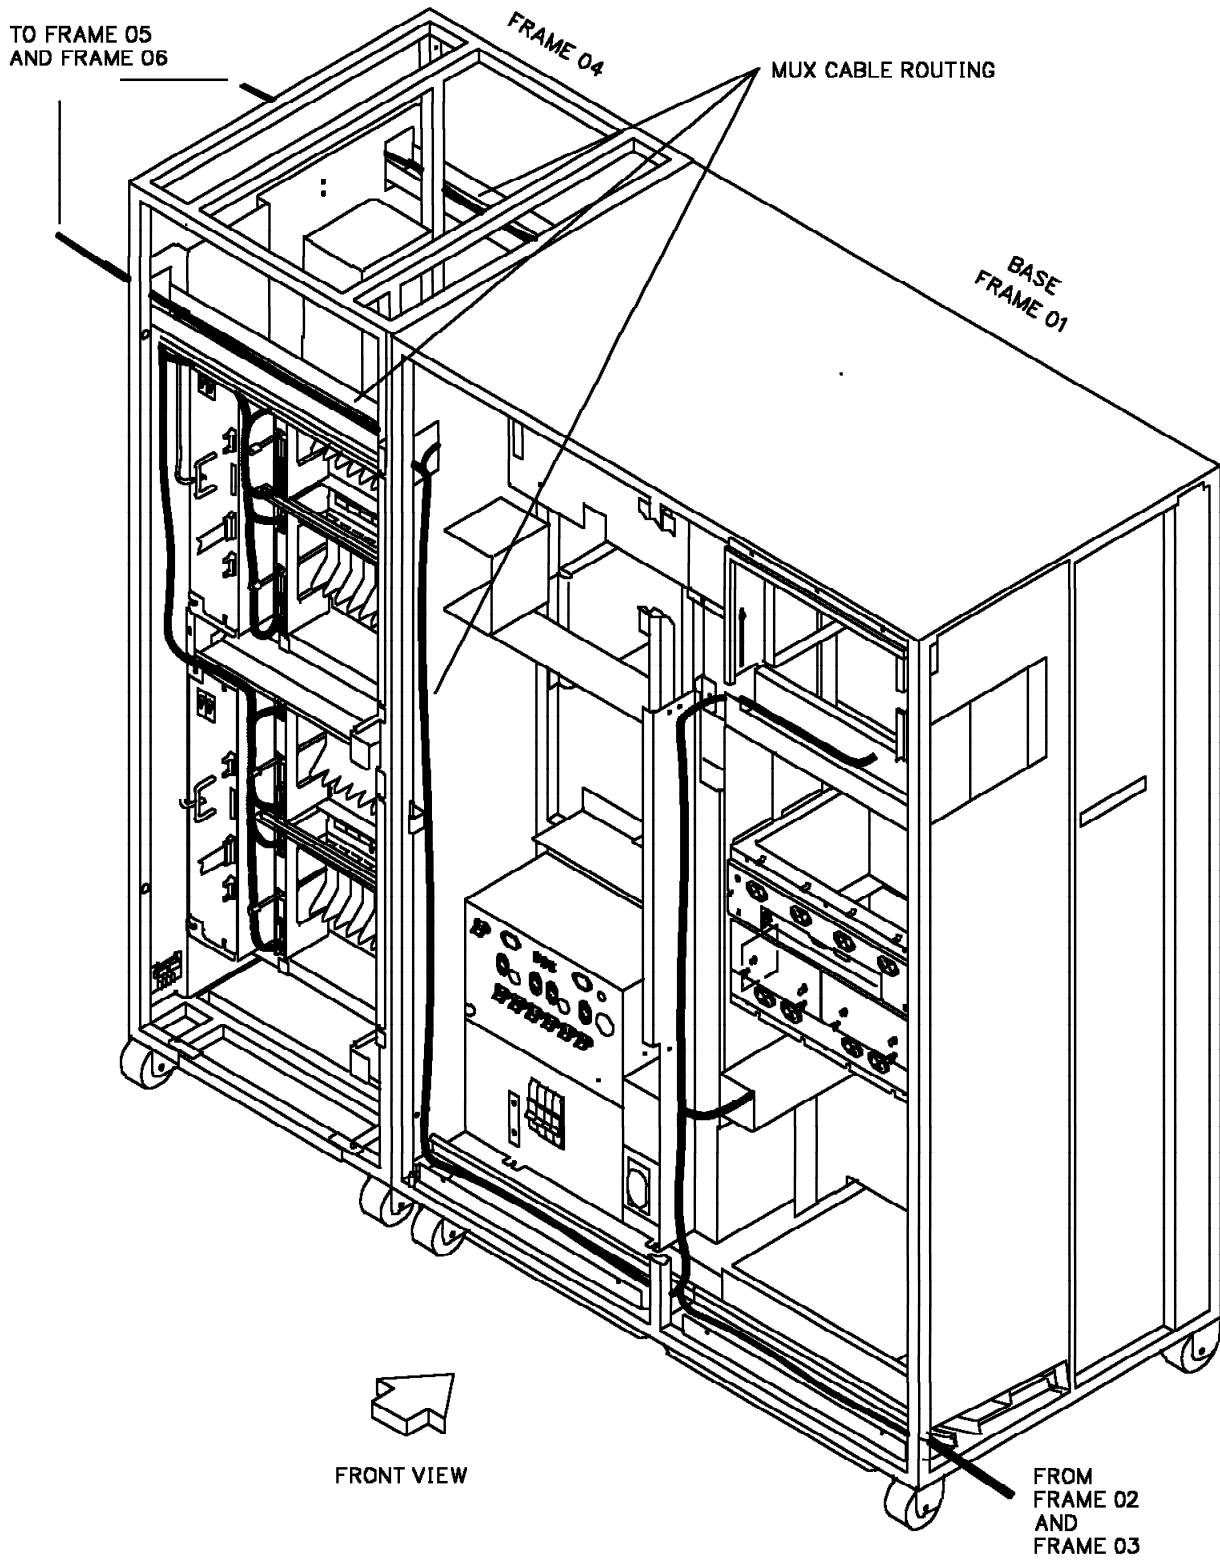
MUX Cable Path from the 3745 to the 3746-L Units (Front View)
